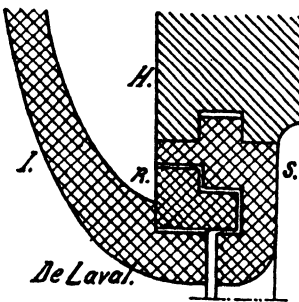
Improved Design of Seal Ring for L.P. Pump.
